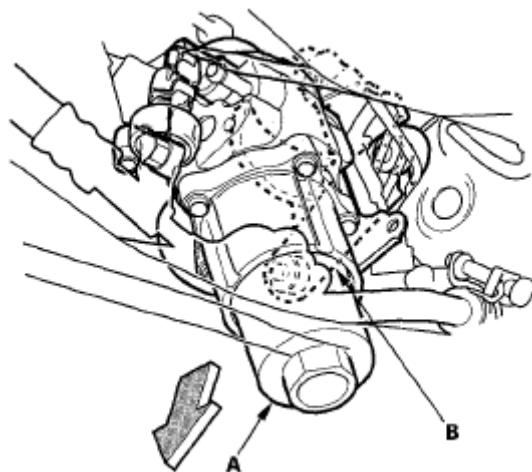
Removing Fuel Pressure Regulator From Bracket
